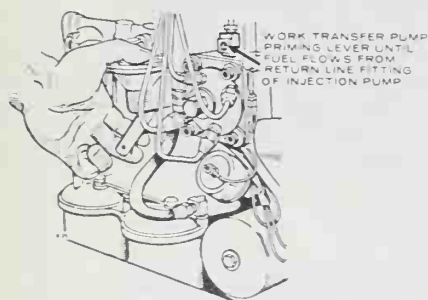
View showing bleeding air on later model fuel system except Model DJE equipped with Bryce or Kiki injection pump.
